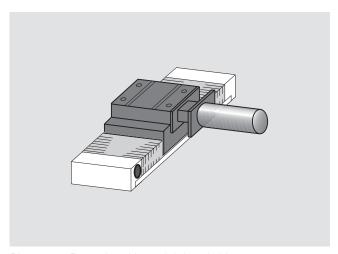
Screw drive with lateral motor mount at right hand side (Mounting condition 04)
